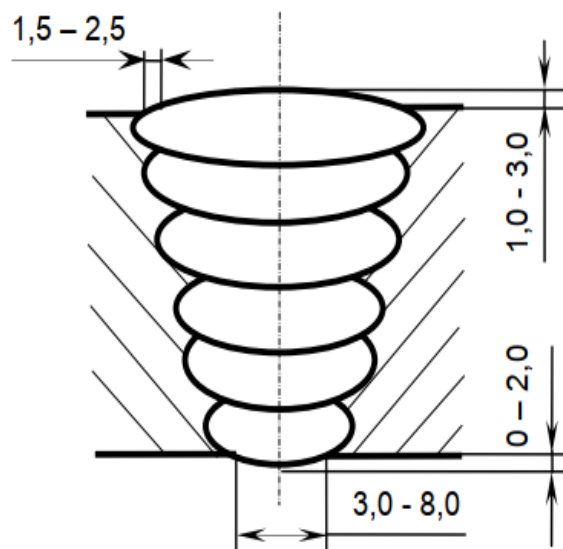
Geometric parameters of the weld made with the CWS.02 welding system
